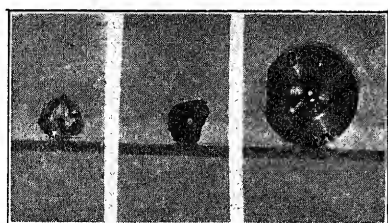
SHOWING DIAMOND BEFORE DRILLING, DRILLED AND LAPPED READY FOR MOUNTING, AND DIE READY FOR USE IN FINAL MOUNTING
